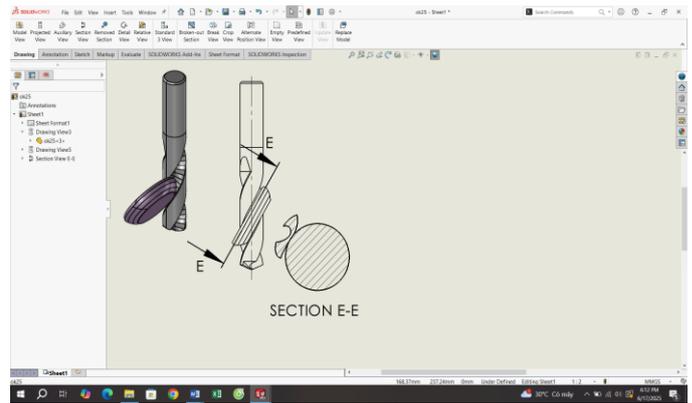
Verify the contact between the grinding disc surface and the drill groove surface (D=25)
